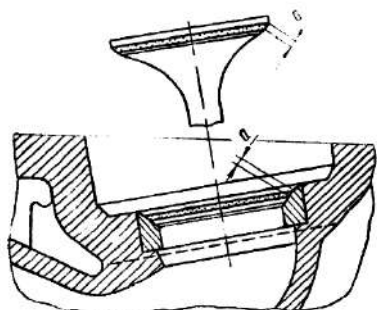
Allocation of mat bands on lapped surfaces of working facets of seat and valve
